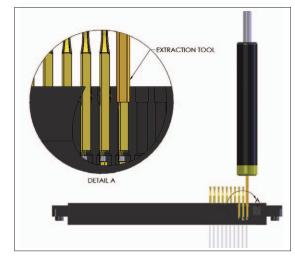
Figure C. Ensure that the tool is kept perpendicular to the module face to avoid damage to the contact or tool.
